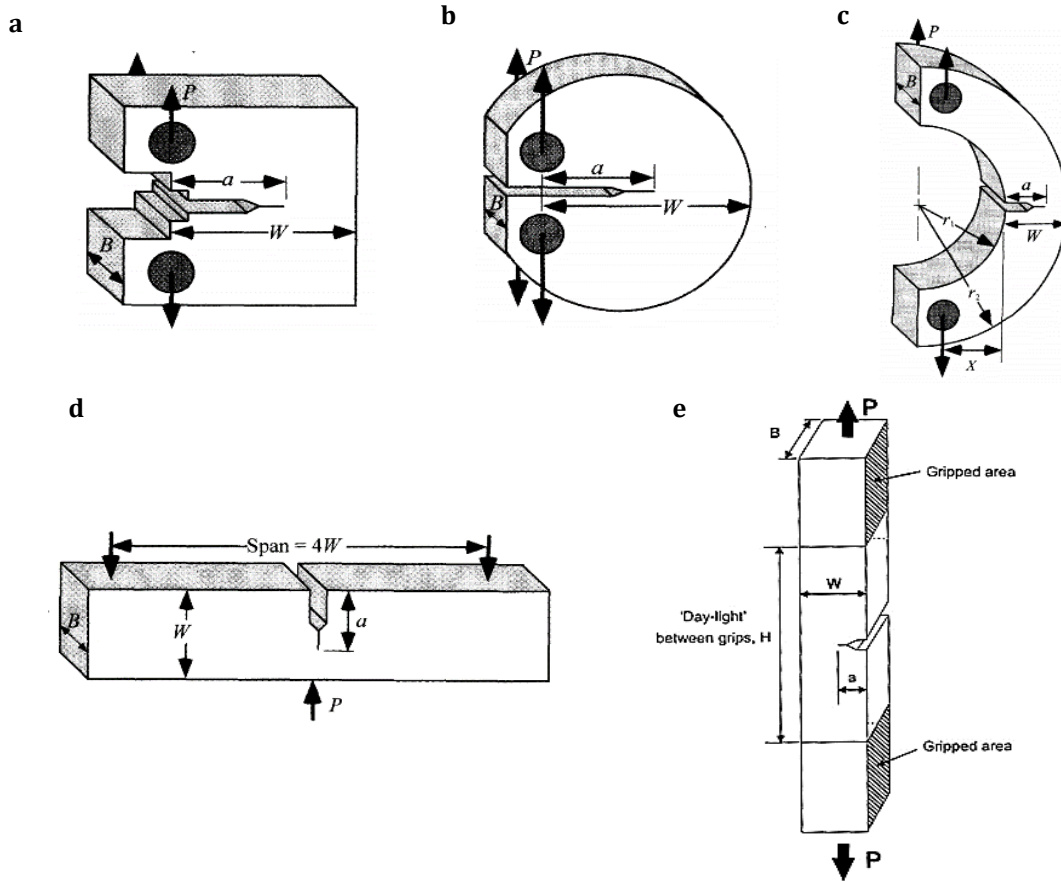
Conventional standardized fracture toughness test specimens: (a) CT specimen, (b) DCT specimen, (c) arc-shaped tension specimen and (d) SENB specimen in three-point bending. (e) developed SENT test specimen [183,200].
